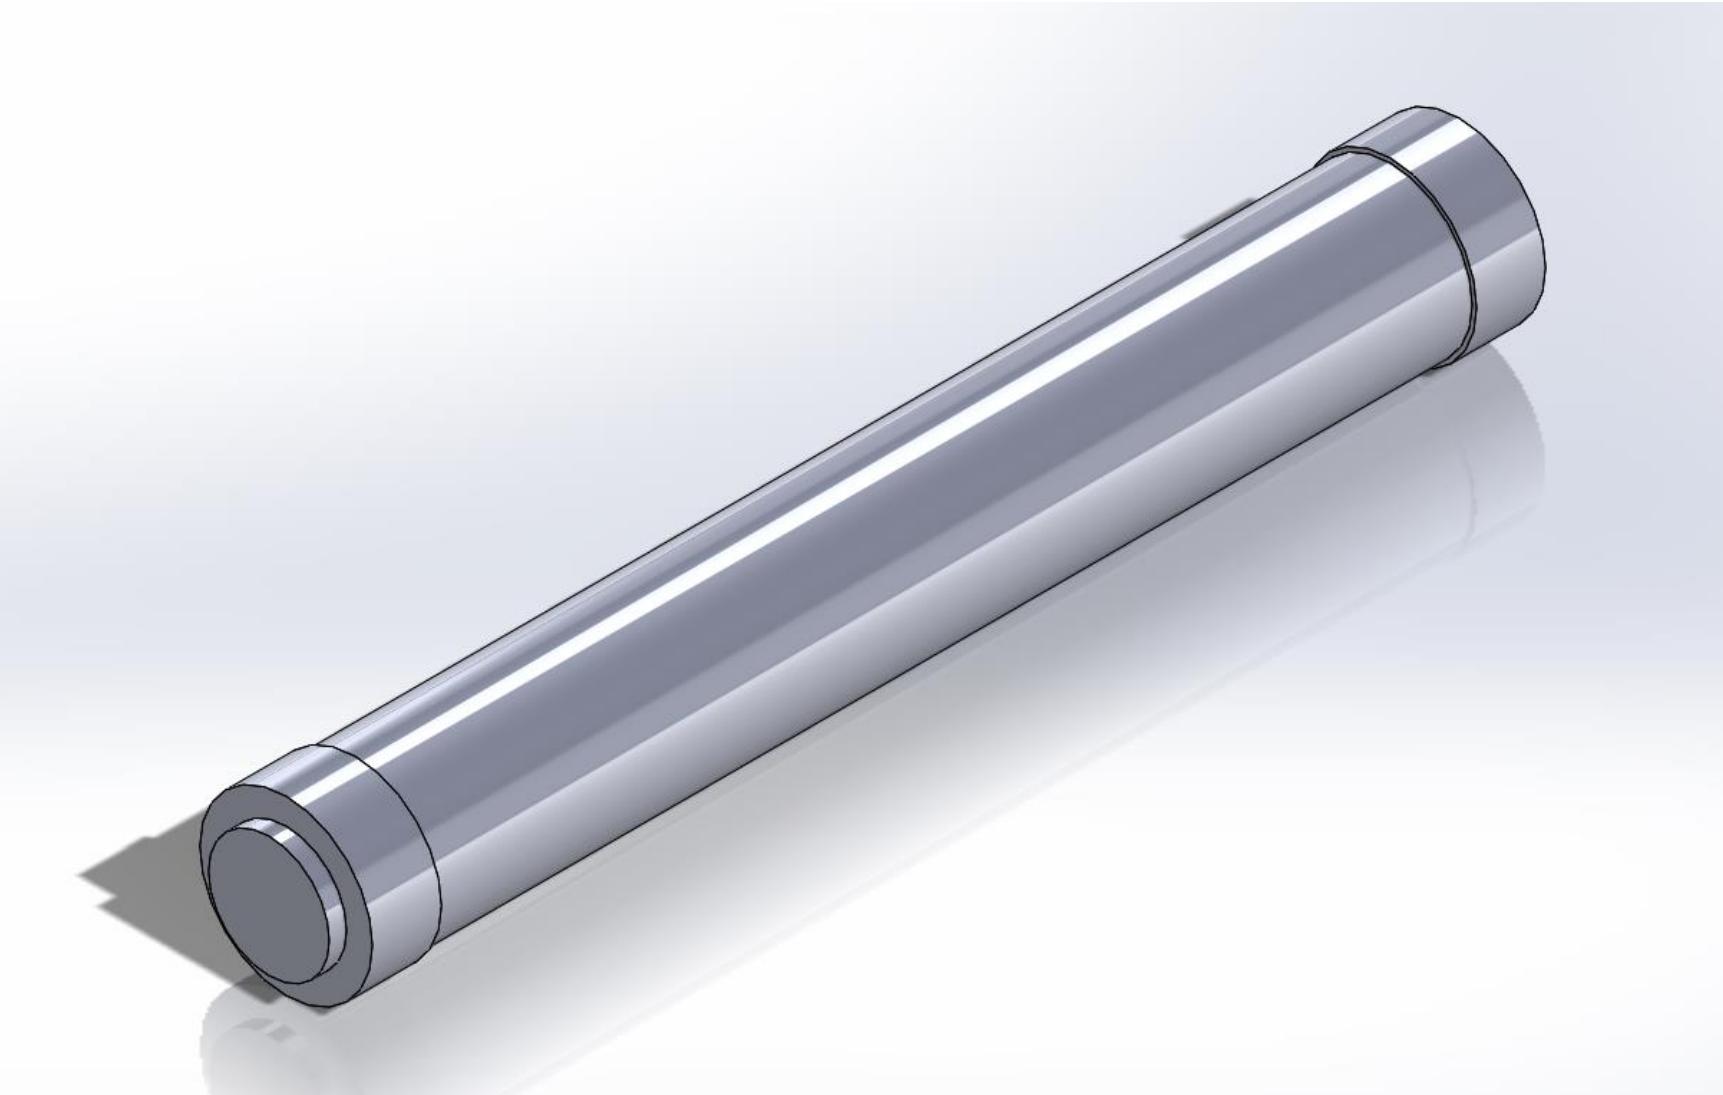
Part 1004 (Magnetorquer Rod) CAD Drawing
